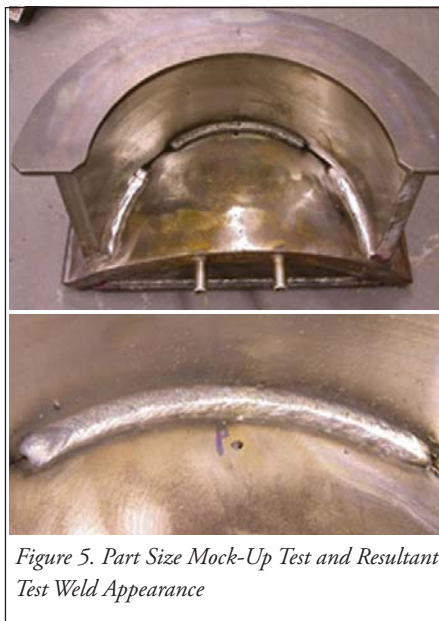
Part Size Mock-Up Test and Resultant Test Weld Appearance
